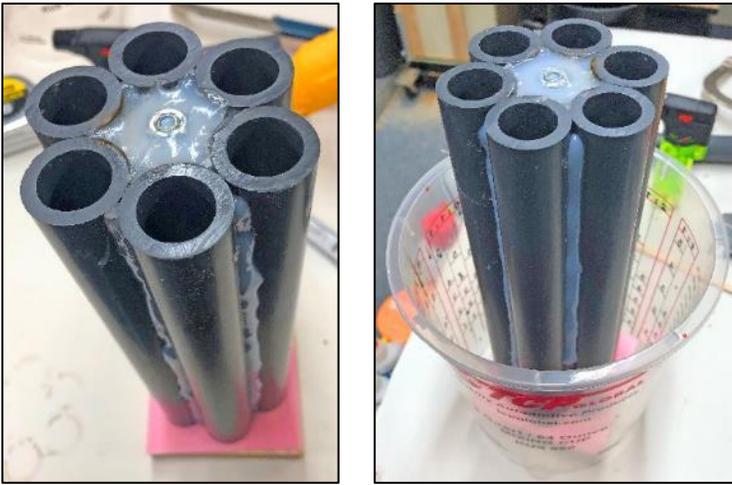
The completed mold with the Mold Body and Mold Base attached.
